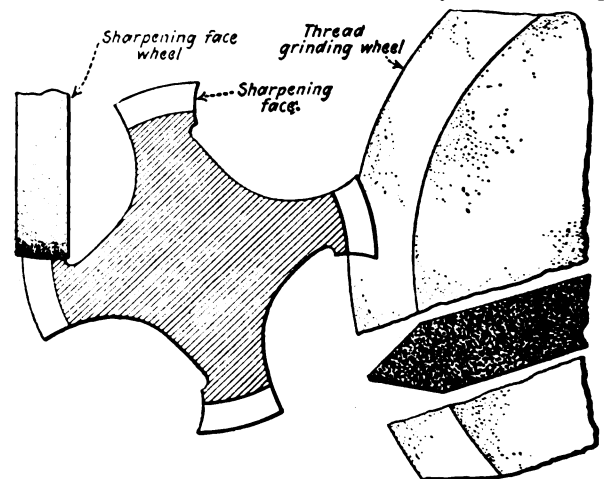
SECTION OF TAP IN CONTACT WITH GRINDING WHEELS
